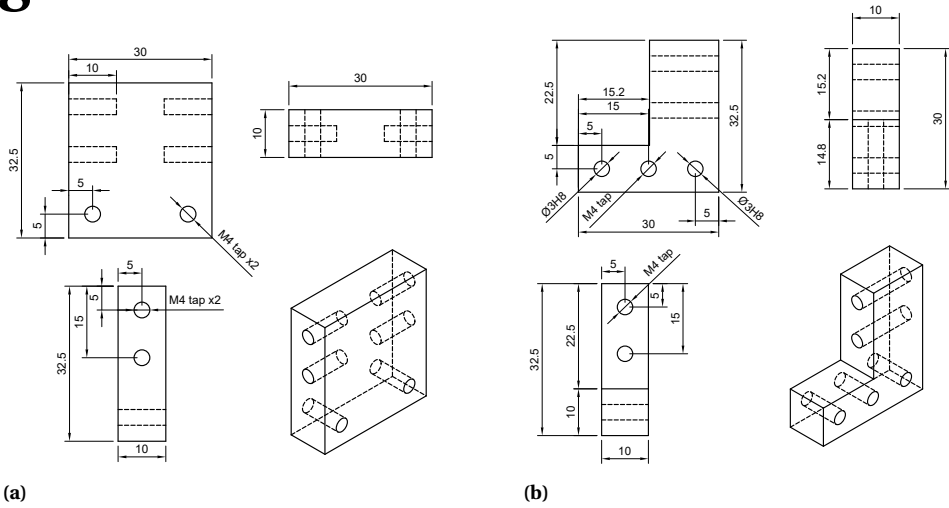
Technical drawings and dimensions of sides for constant (a) and variable (b) flexure clampings
